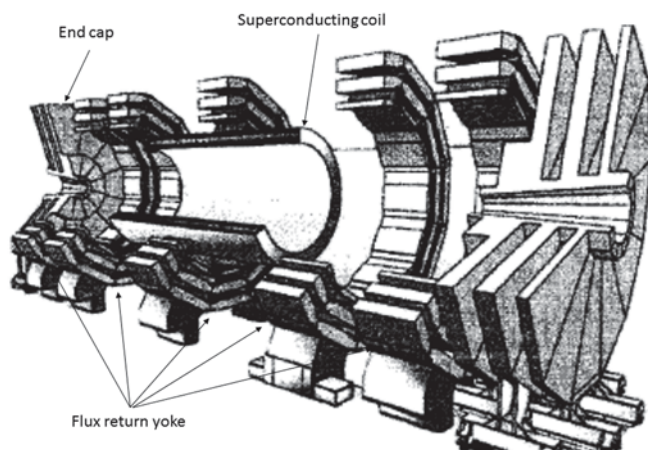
Schematic exploded view of the CMS solenoid magnet.
